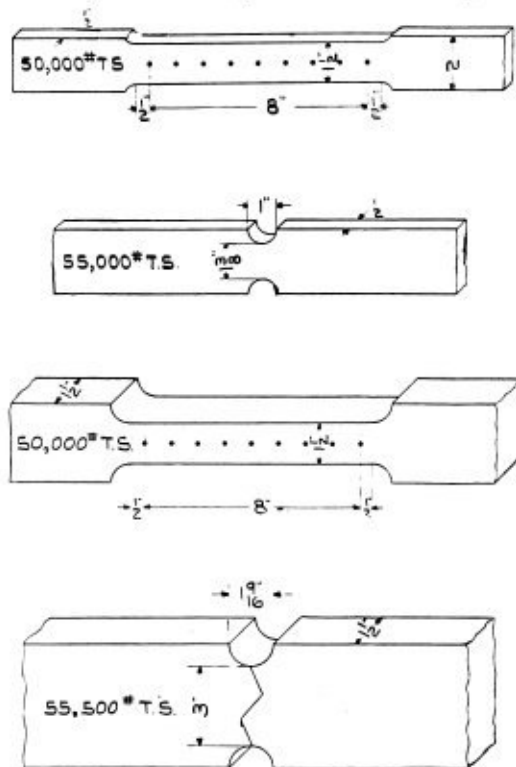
Showing approximate dimensions of tests representing metal between the rivets in standard A. S. M. E. rivet joint
